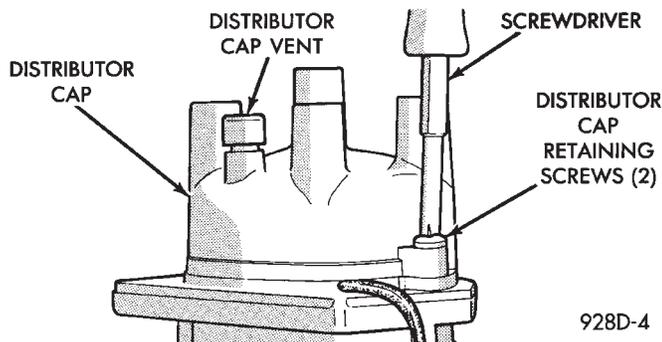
Distributor Cap Retaining Screws—2.5L Engine
